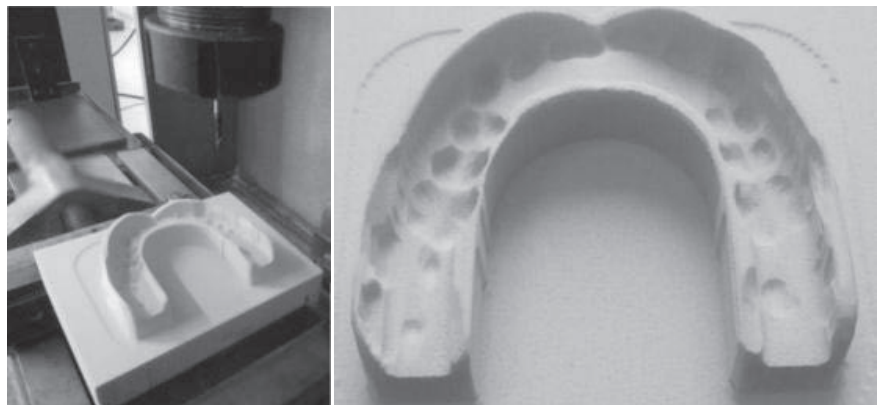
Example of mouthguard surface machining using a CNC milling machine.
